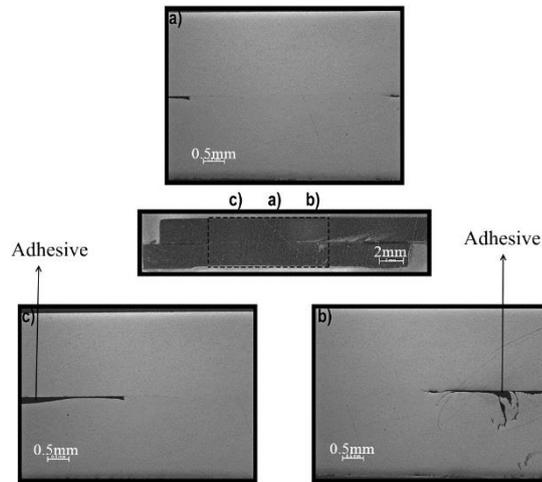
Macroscopic and microscopic figure of the Hyb-5 weld cross sections; a) center of the weld, b) retreating side and c) advancing side.
